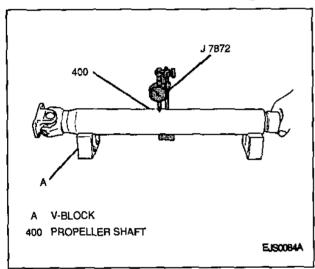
Measuring Propeller Shaft Runout Off the Vehicle
